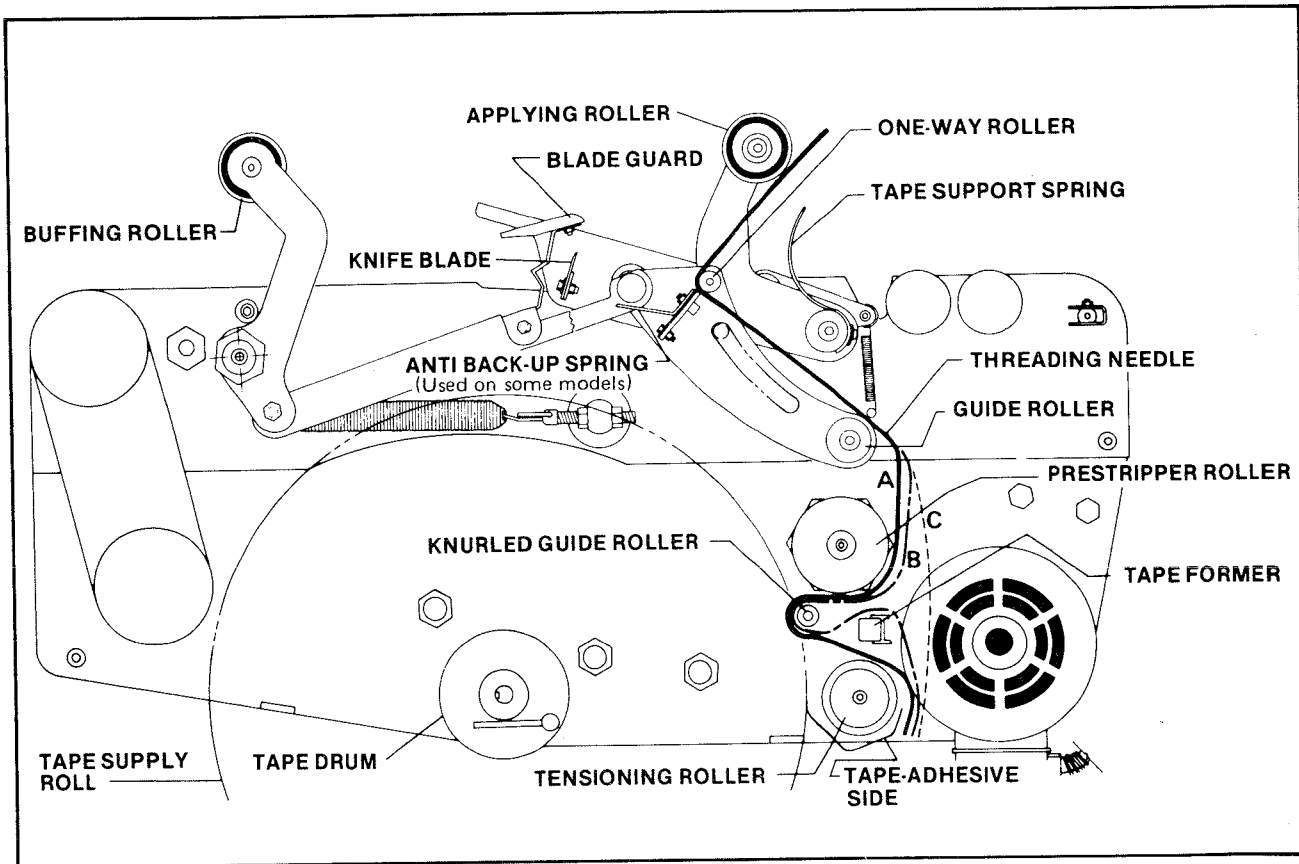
TAPE THREADING DIAGRAM - BOTTOM TAPING HEAD - LEFT SIDE VIEW
